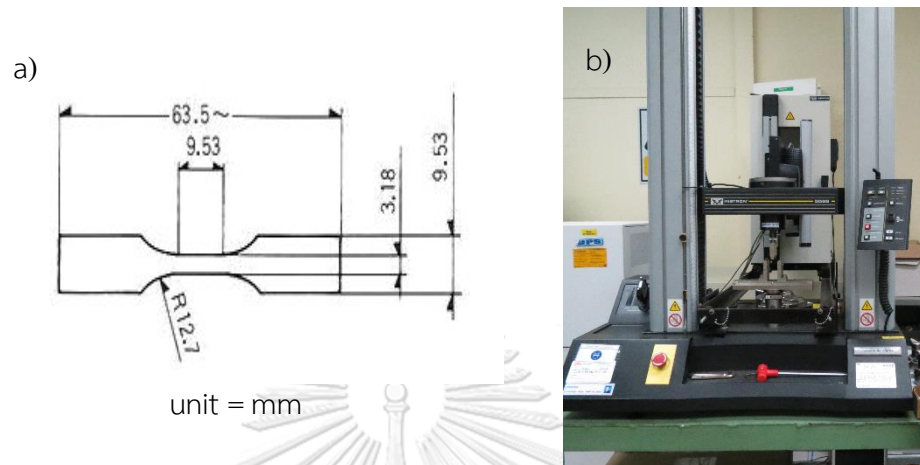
a) Tensile specimen dumb-bell shaped following ASTM D638-V and b) universal testing machine (Instron 5566, Instron, Illinois/ United State)
